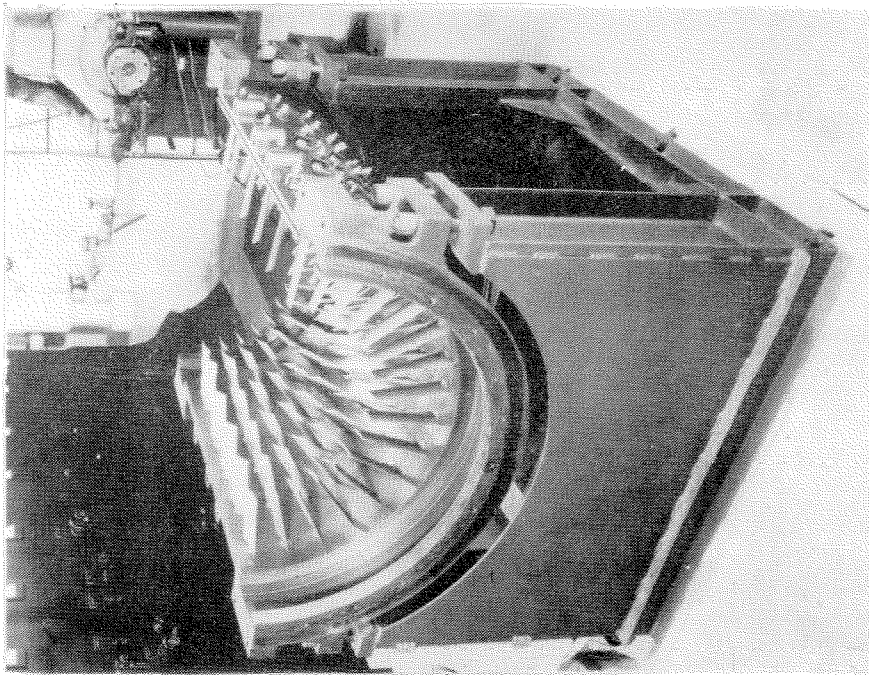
LOWER HALF OF COMPRESSOR CASE.
